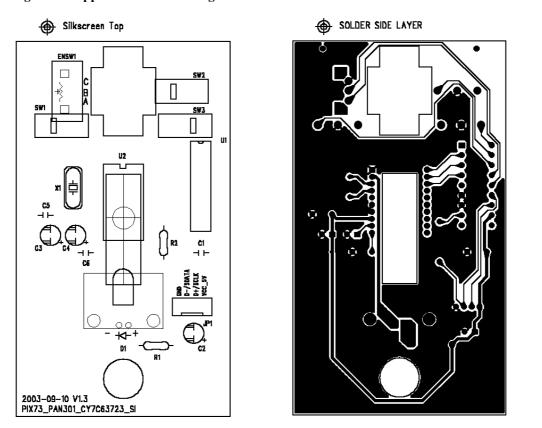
Example printed circuit board layout. (PAN301ASI-20X V.S CY7C63723-PC)
